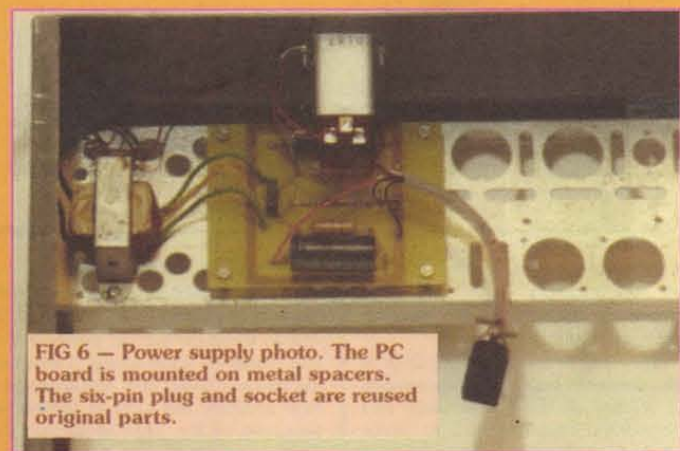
Power supply photo. The PC board is mounted on metal spacers. The six-pin plug and socket are reused original parts.
